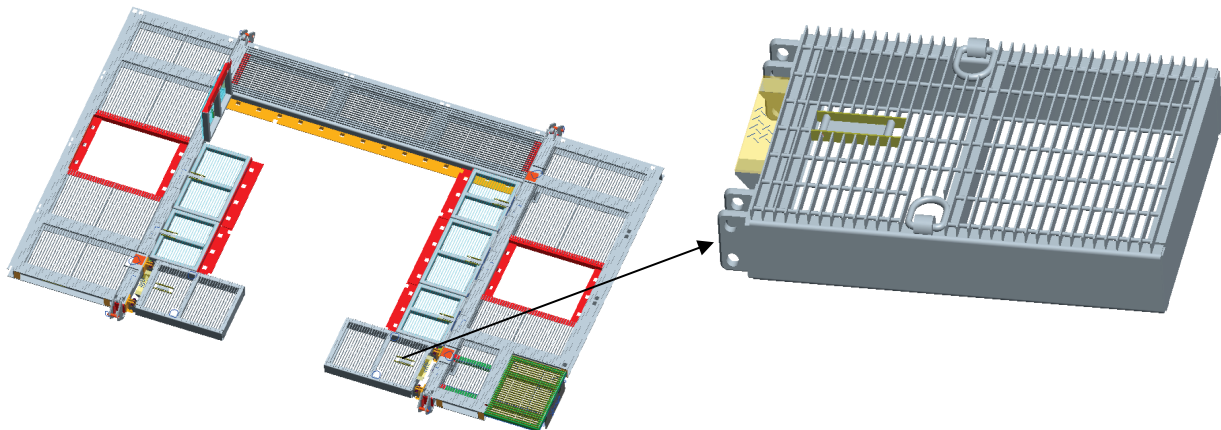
, Addition of Two (2) Extensions to the Platform & Locking with Existing Pins
